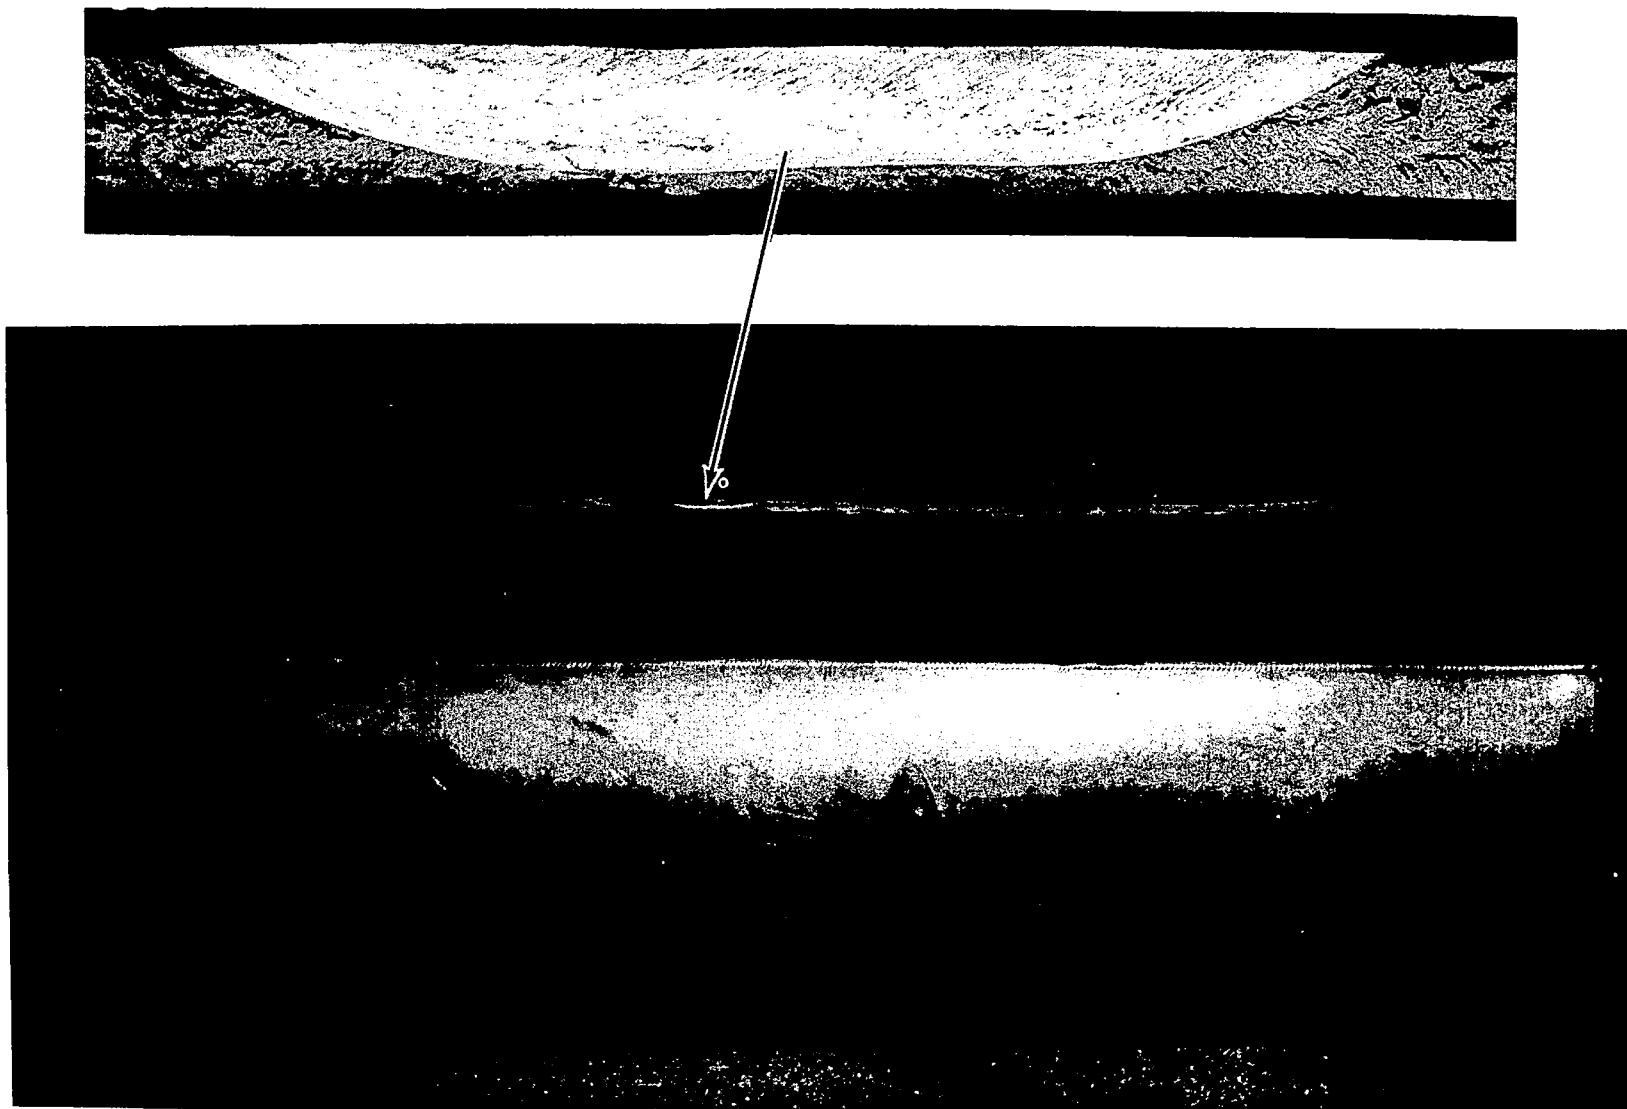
Fracture Cylinder Section and Close-up View of the Longitudinal Weld PTC Flaw for the 2219-T87 Aluminum Vessel Hydroburst at -320°F .
